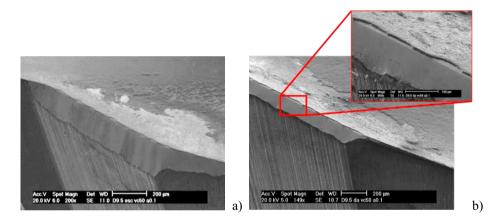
Detailed view of the main cutting edge corner of the secondary stages of the tools after 285 holes; (a) Step drill bit; (b) Double point angle drill bit. The amplification view of Figure 3.b shows the fragile breaks of the diamond coating on the rake surface close to the cutting edge.
